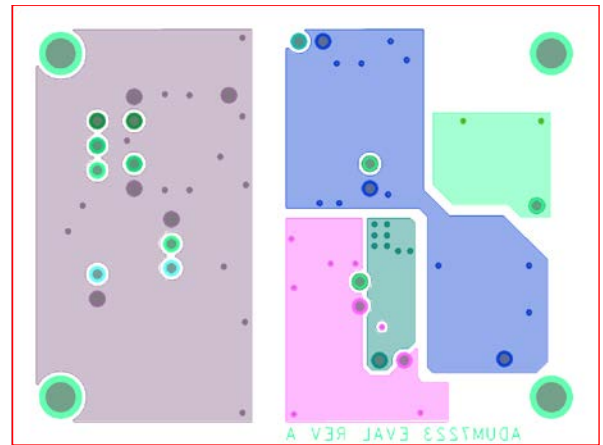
ADuM7223 Evaluation Board Bottom Layer
